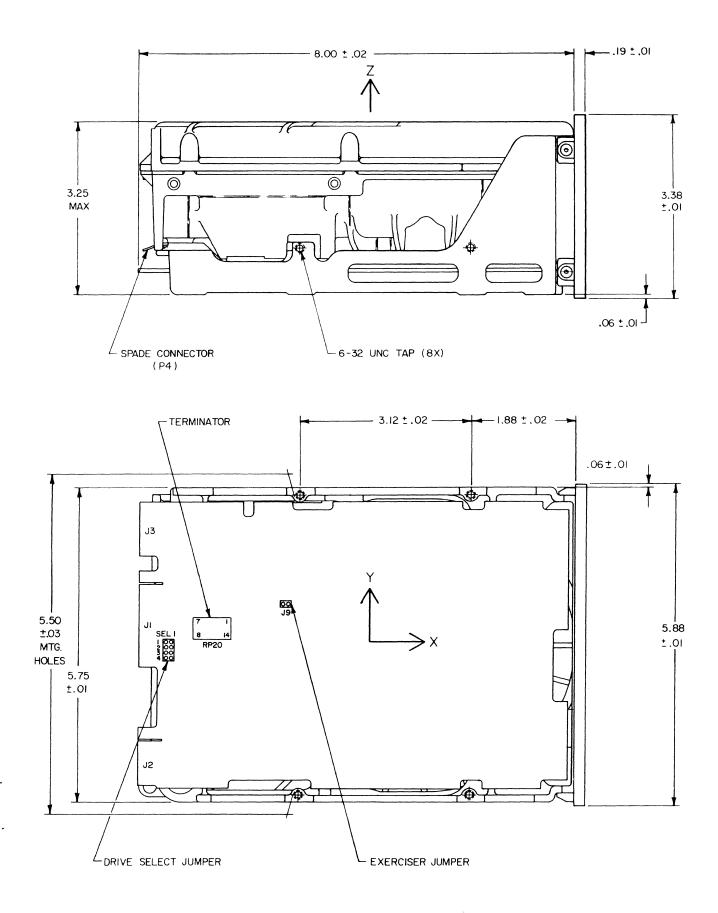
OUTLINE AND MOUNTING DIMENSIONS
